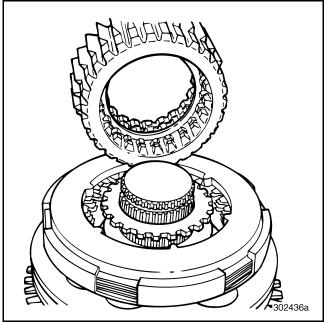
Installing Hi-Range/Hi-Split Gear (T313L21/T318L21 Shown)
